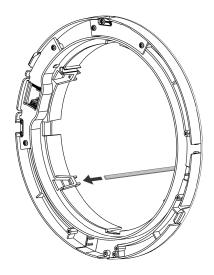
Strips from the outside hood are guided into the internal wall cover
